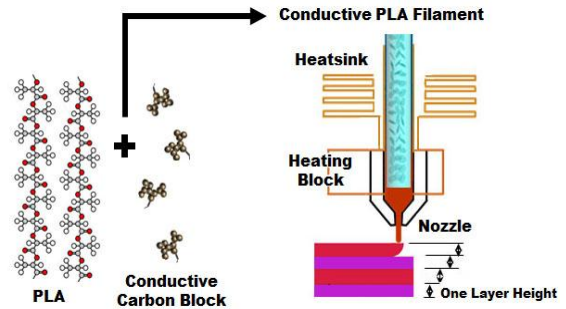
Simplified schematics depicting the process of conductive PLA-based 3D printing using the technique of FDM^[7].
